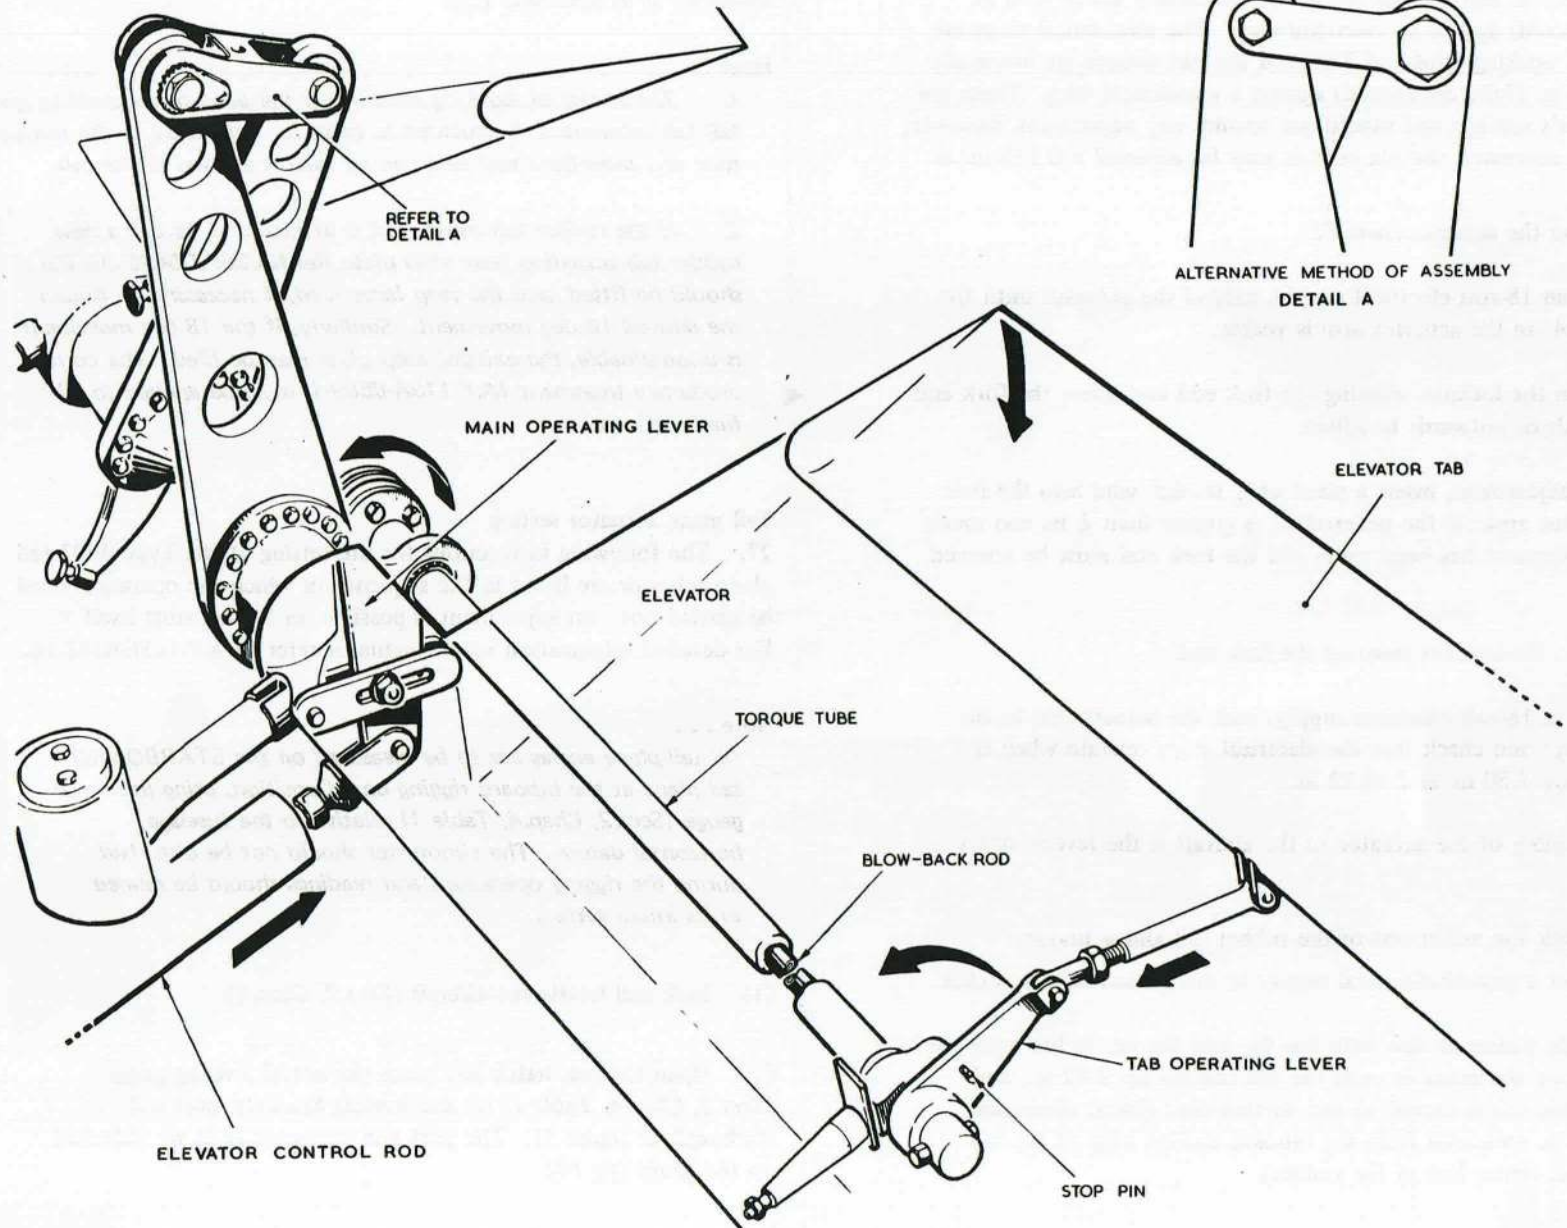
PORT ELEVATOR SPRING-TAB MECHANISM
